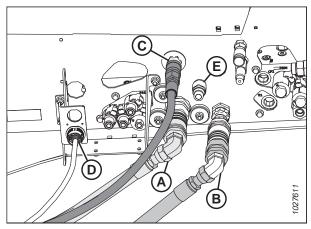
Quick Couplers on Rotary Disc Ready Windrower with Case Drain Kit
